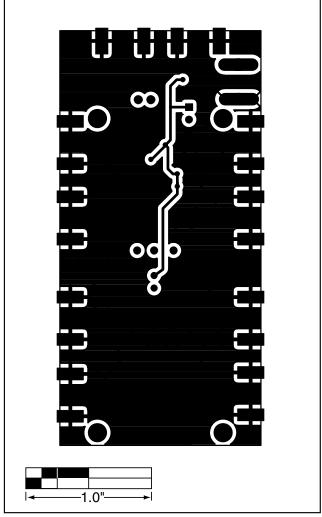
MAX3971 EV Kit PC Board Layout—Solder Side
